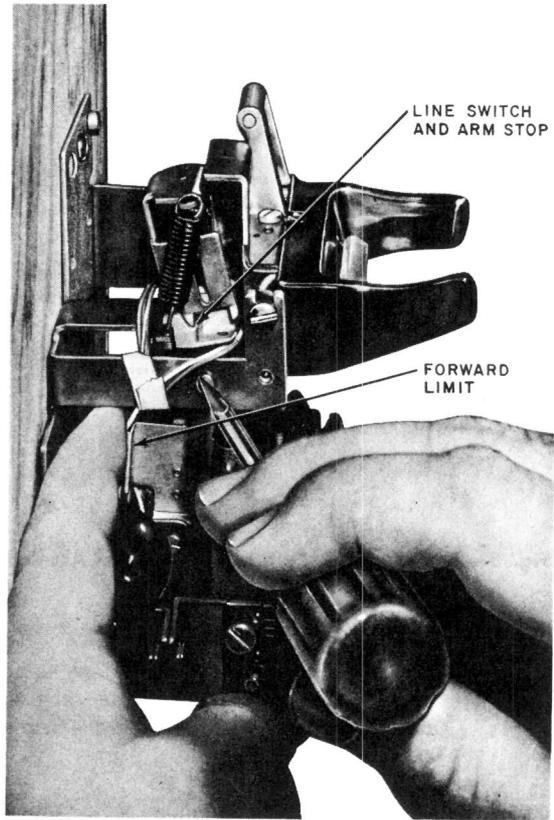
D-180383 Kit of Parts, Installed on 526B Telephone Set Base
